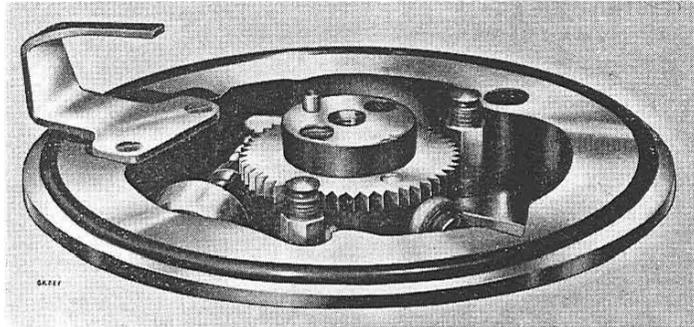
MOULDED BODY DIAL—WITH FINGER PLATE AND NUMBER RING REMOVED
